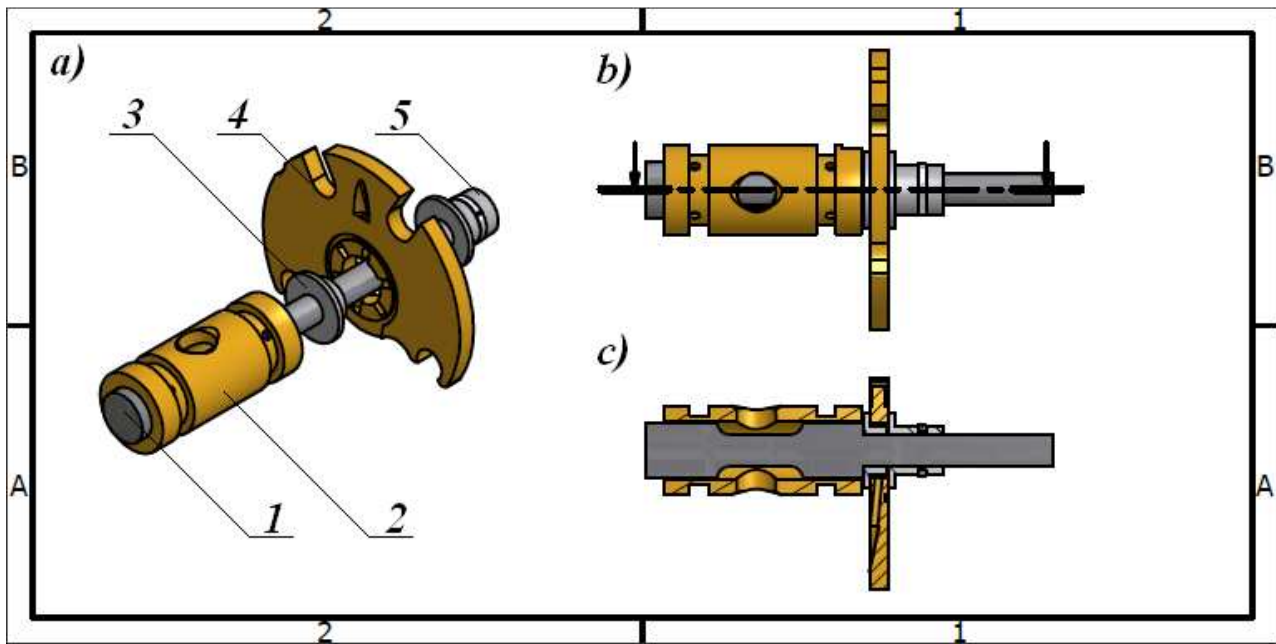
Construction of a turbocharger bearing system: a) isometric view 1 - shaft, 2 – journal bearing bush, 3, 5 – bearings pin, 4 – journal bearing disc, b) view of submission, c) cross-section view
